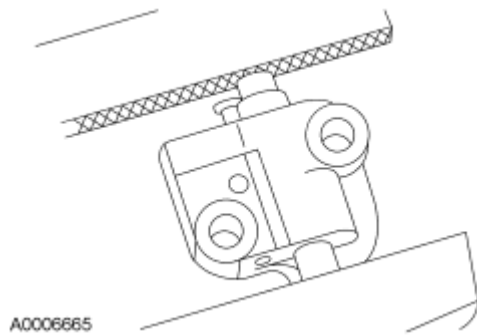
Identifying Chain Tensioner In Soft-Jawed Vise
